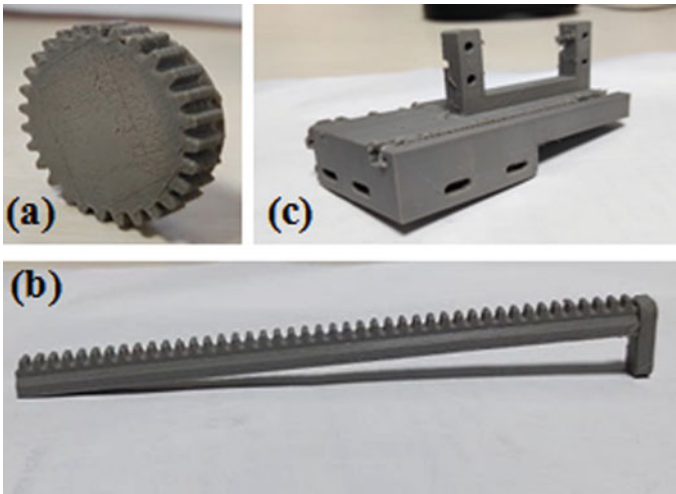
3D printed a pinion, b rack and c casing of the device
